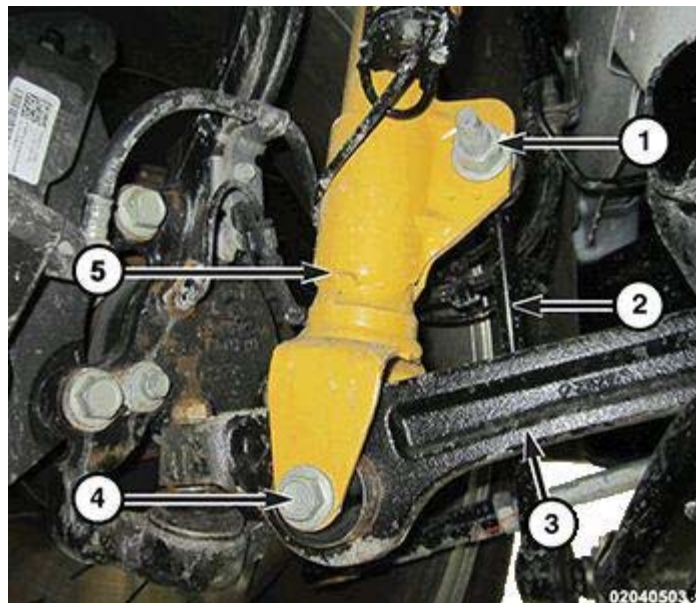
Stabilizer Link To Strut Nut, Stabilizer Link, Lower Control Arm, Lower Control Arm Bolt & Shock/Strut Assembly
